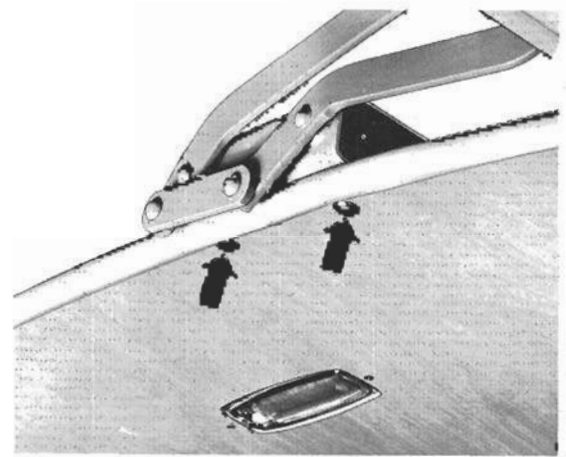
Phillips head screws with self-locking nuts. These screws hold the front hinge on the trim pane and roof pan.
